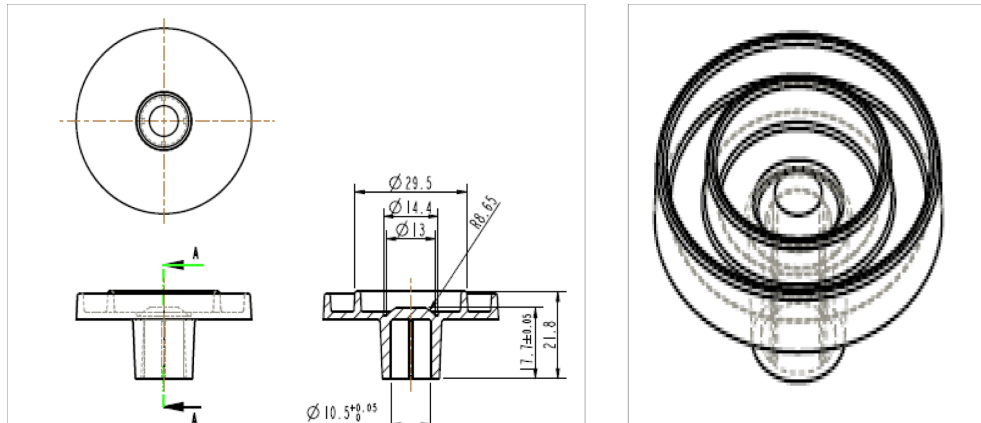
Design drawings of the wet cell holder developed in Korea.
